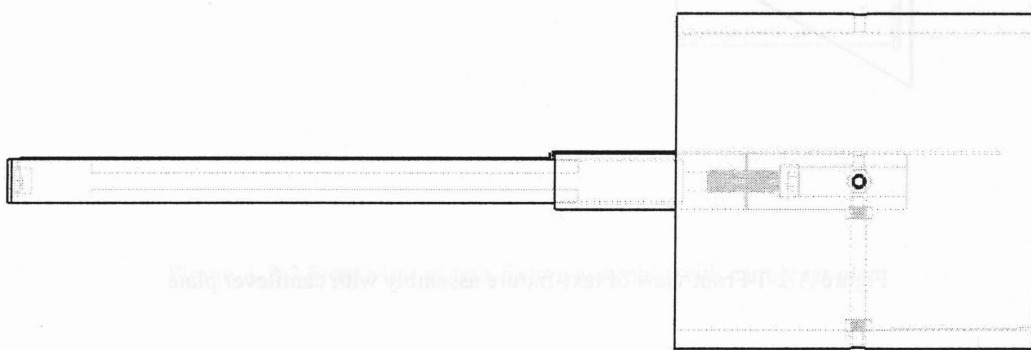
Front view of text-fixture assembly with cantilever cylinder
